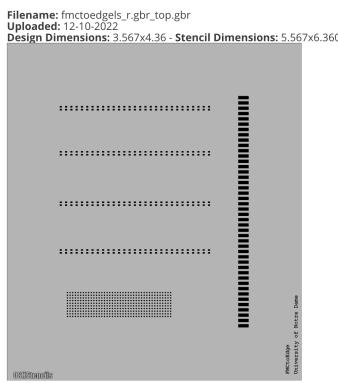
Render of Fabricated FMC to Card Edge Connector Stencil
